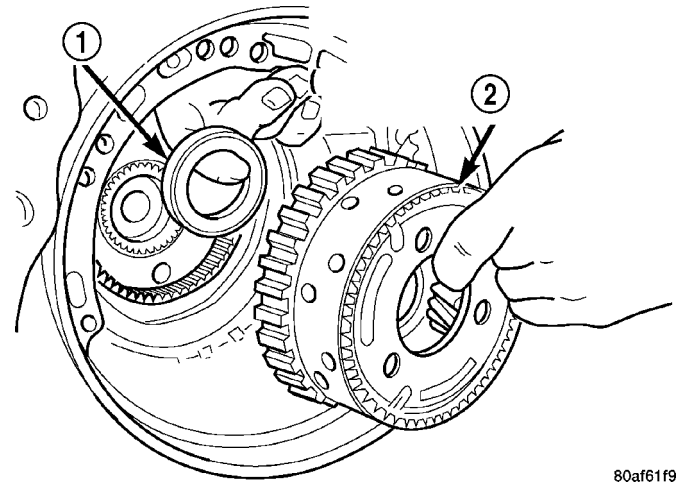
Install Front Carrier/Rear Annulus Assembly
